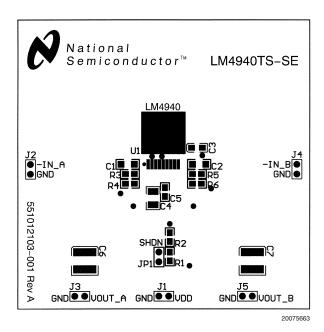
Recommended TS PCB Layout: Top Silkscreen
